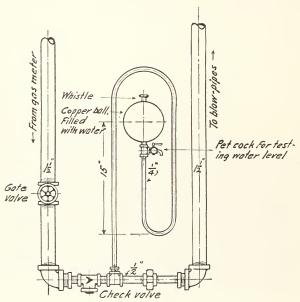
Device for protection of gas main. Operation: When pressure becomes excessive, as when the tip of a burner is clogged, the check valve closes, preventing the back pressure reaching the meter. Should a flame from a burner run back through the pipe, the check valve will close, forcing the flame through the small pipe into the ball, where it will be extinguished by the water. Whistle indicates low water
